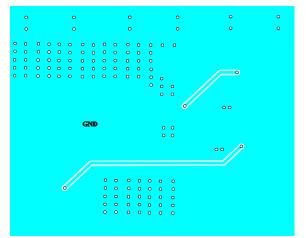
Bottom Layer, 13-Pin PFN MP8761 PCB Layout Guide
